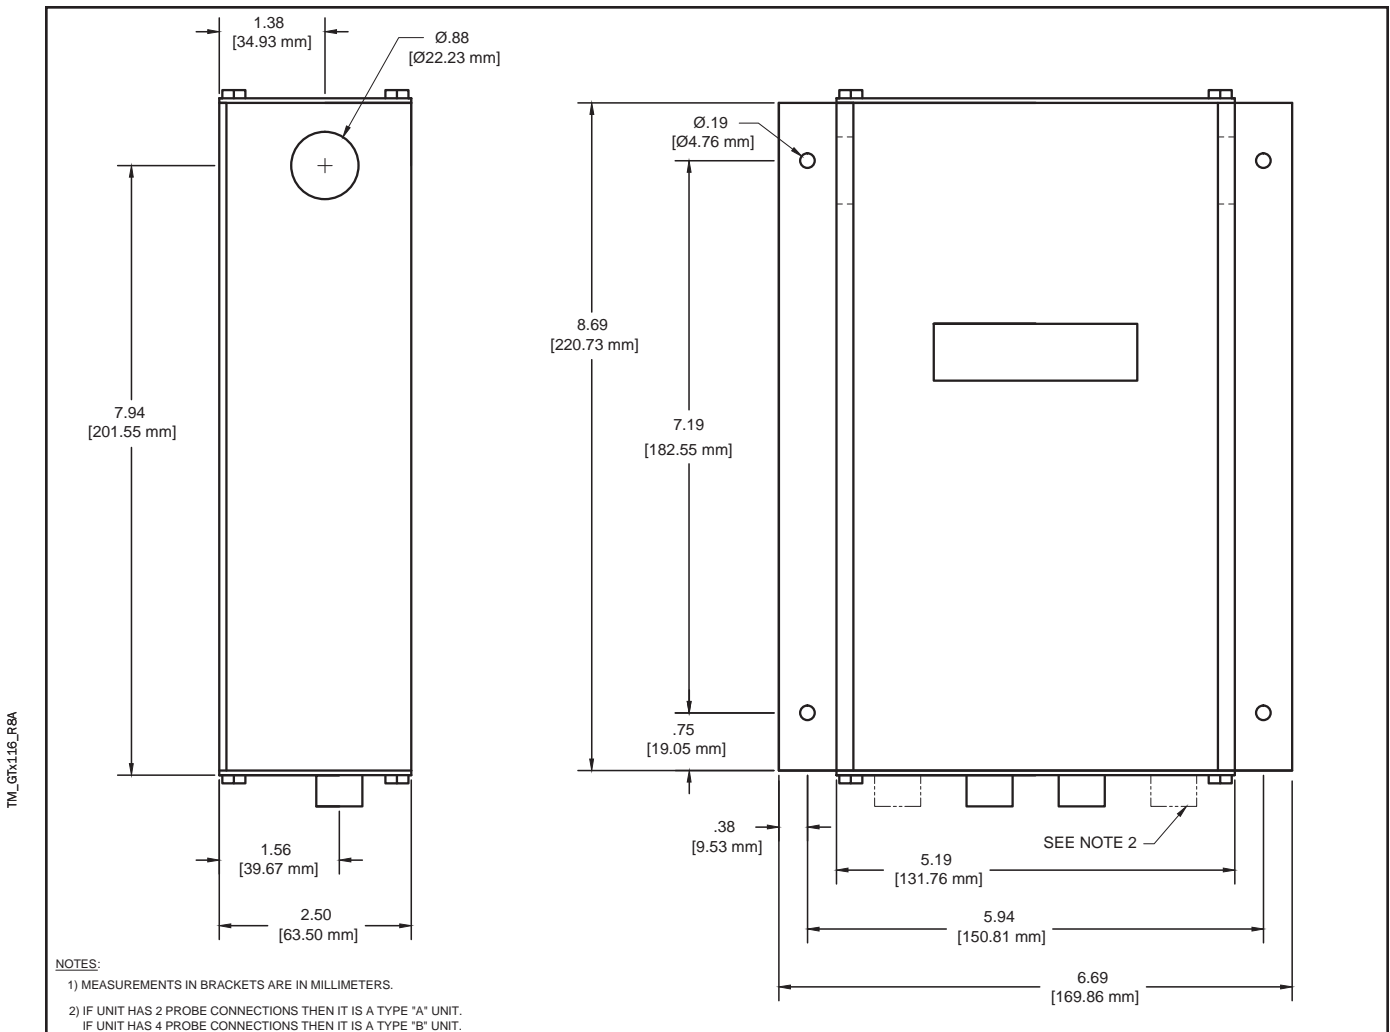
GTx116 Transmitter Mechanical Detail Drawing
